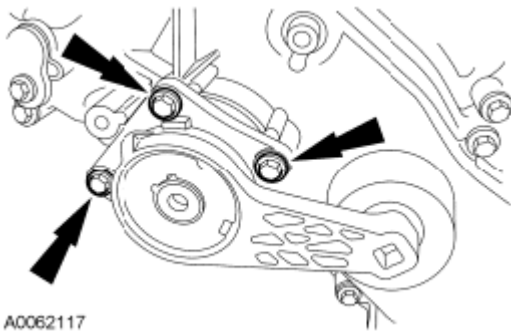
Locating Accessory Drive Belt Tensioner Bolts
